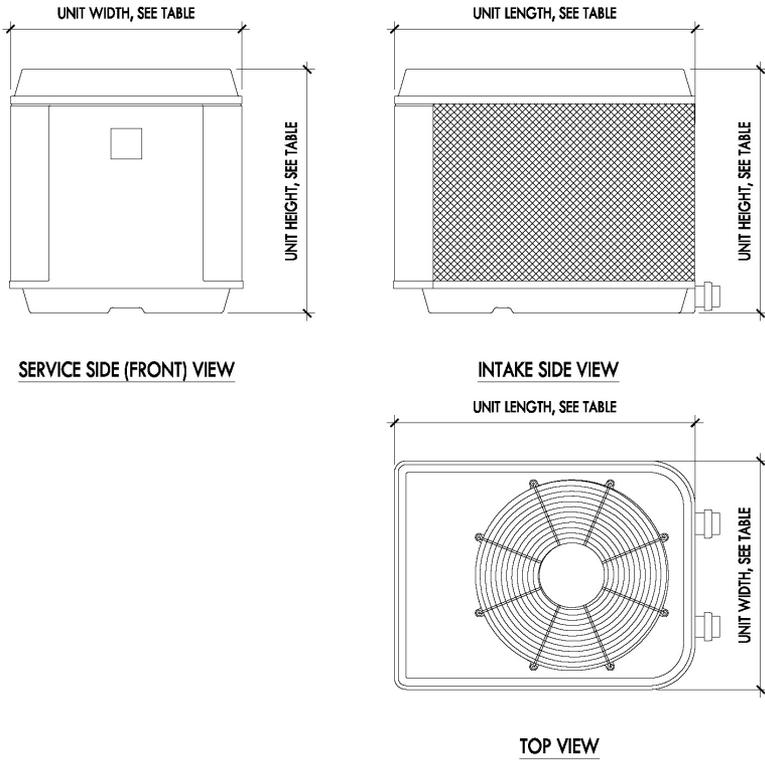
HEAT PUMP DIMENSIONAL DRAWINGS
